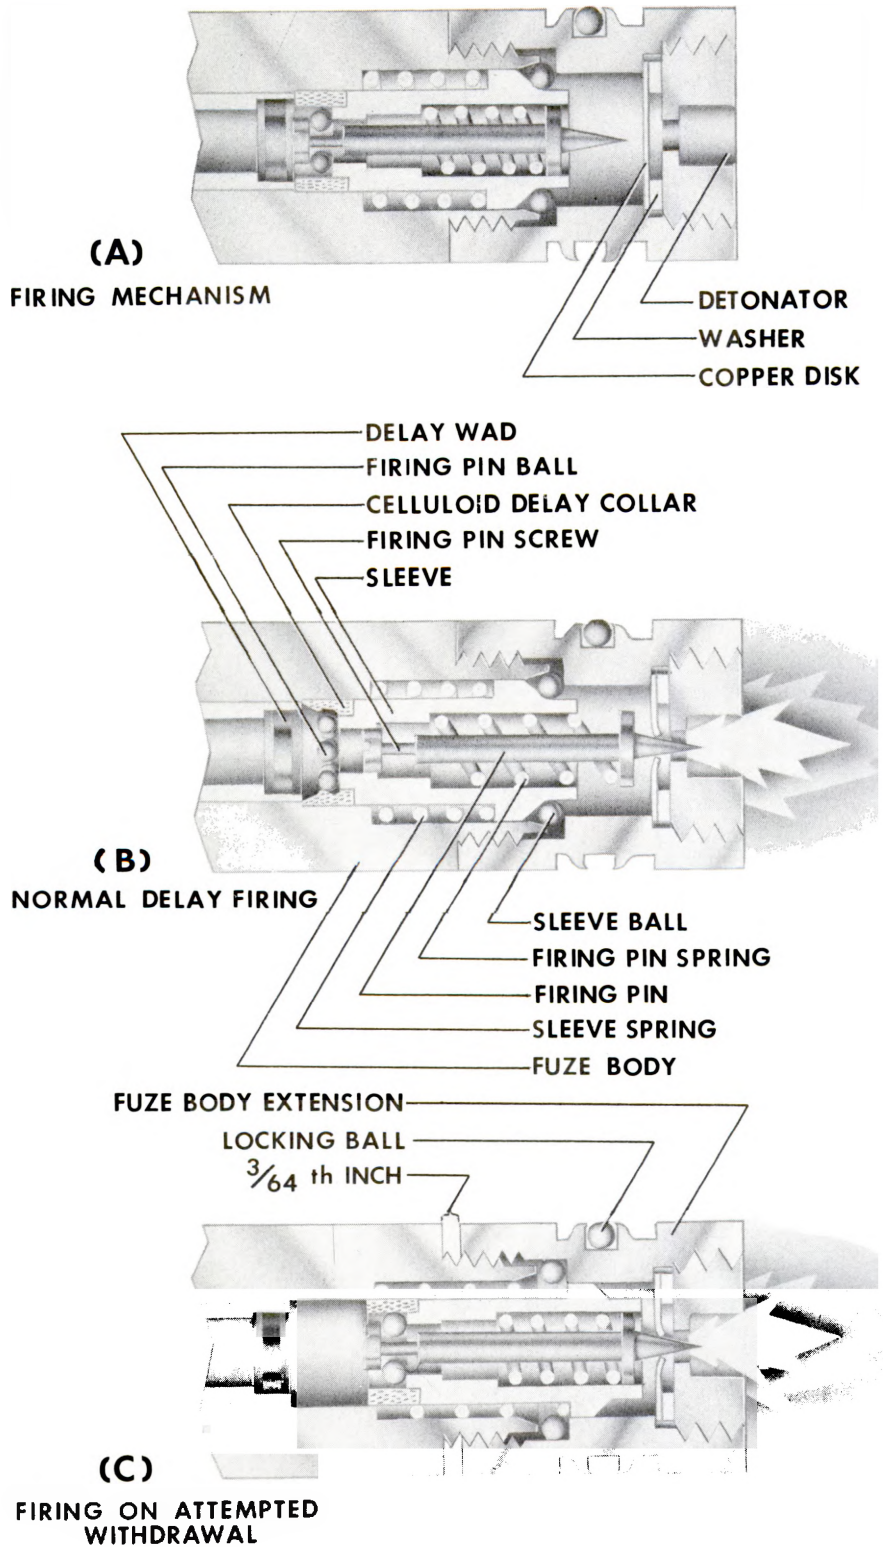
Tail Fuze M123A1 cutaway view.
